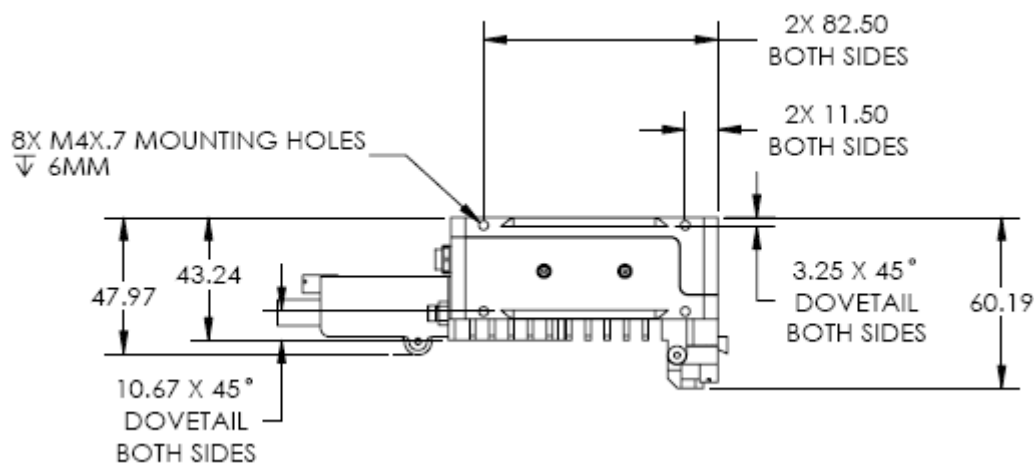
HG-CH Interface Unit dimensions and mounting holes, side (in mm)
